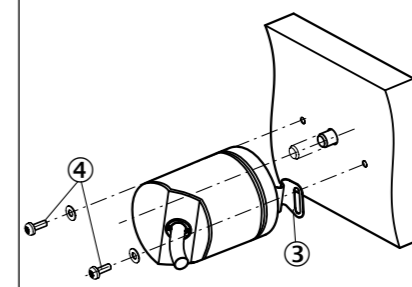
Installation DBS36 face mounting flange via threaded holes on the flange side
